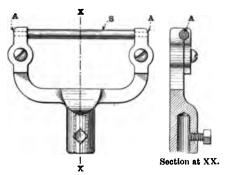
CHUCK FOR ARMATURE WINDING.
